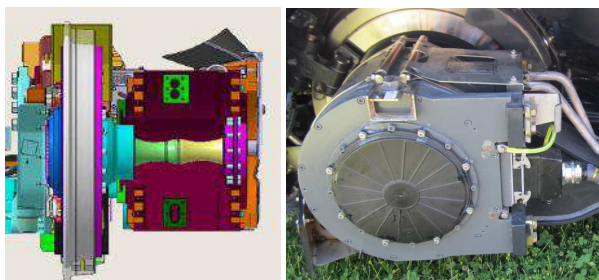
Concept of drive wheel of tram Skoda 15 T.
